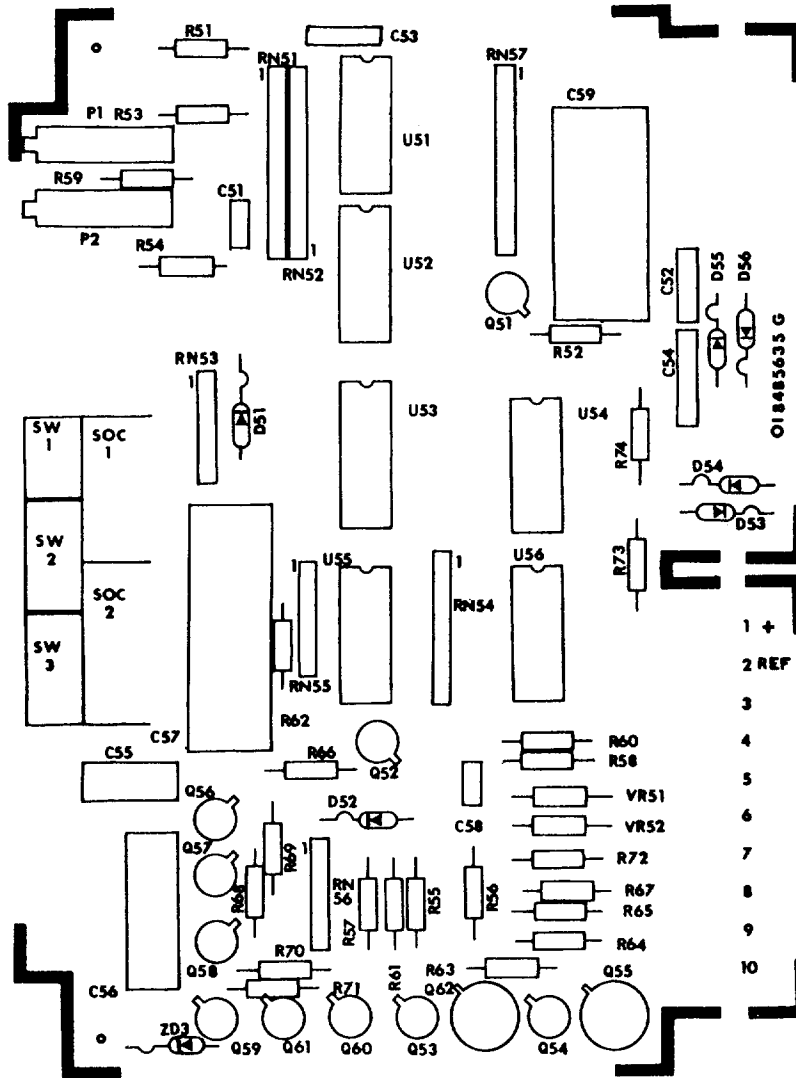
(0184B5635 [3]) Physical Parts Location Diagram of Printed Circuit Card "A"
